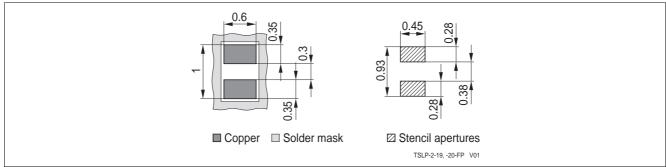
TSLP-2-20 Footprint (dimension in mm)
